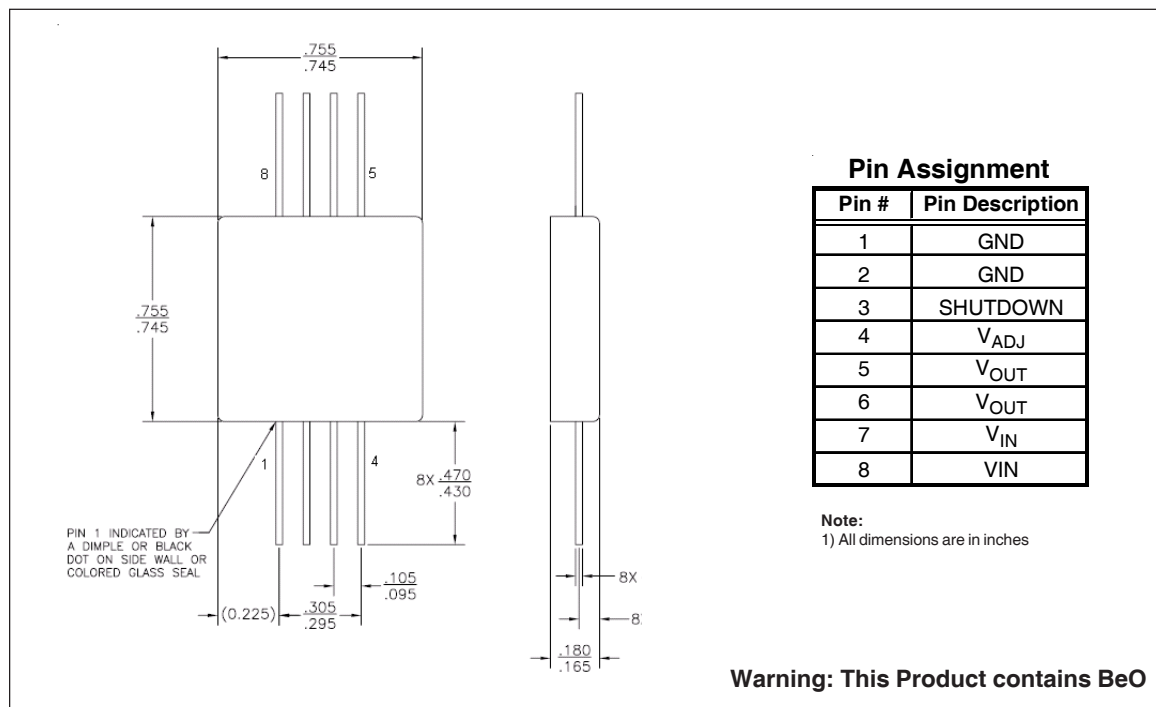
Case Outline and Dimensions - 8-Lead Flat Pack (Lead Trimmed)
